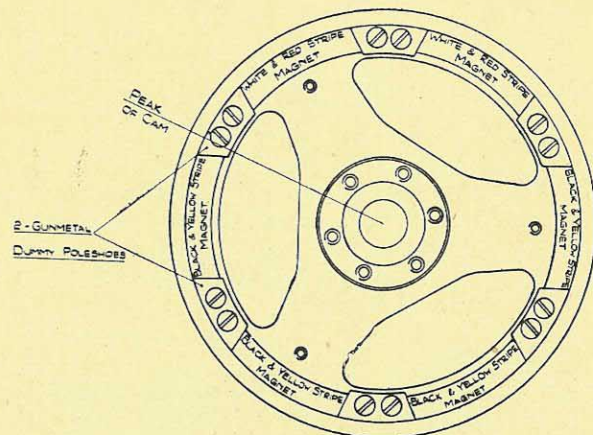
FLYWHEEL ASSEMBLY OF SIX-POLE 18-WATT MAGNETO.
